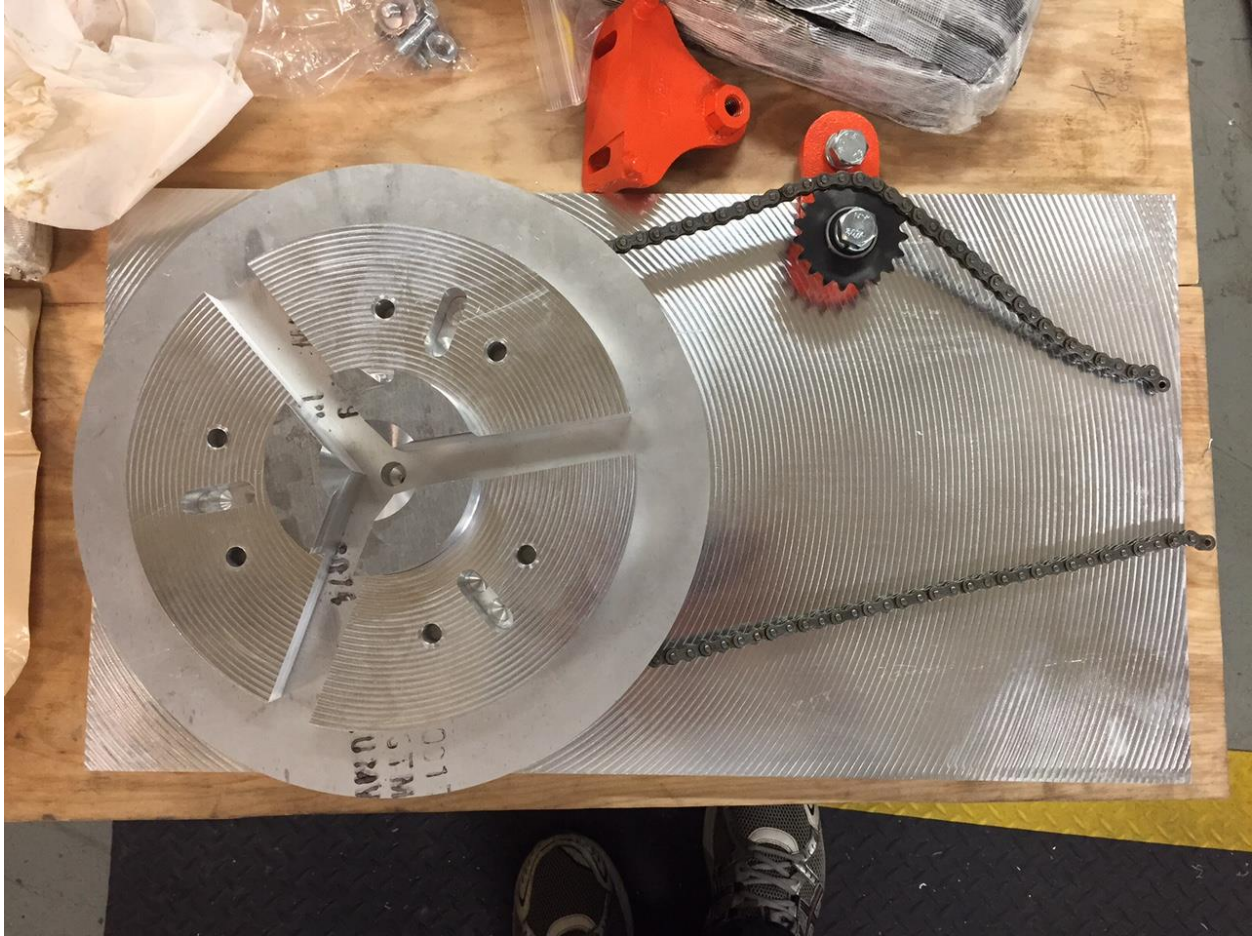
Machined Turntable Parts Aligned for Assembly with Chain Tensioner
